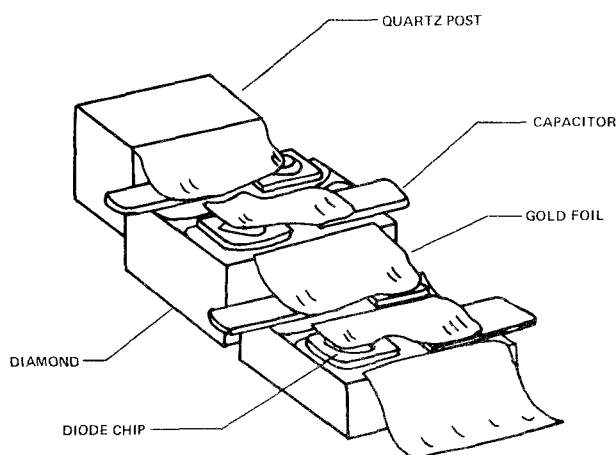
Sketch, four-chip 60-W pulsed diode assembly.
